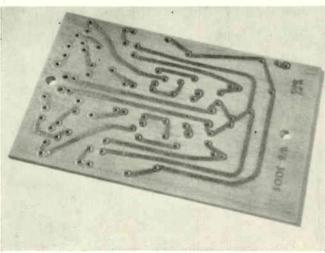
, above, is a full-size printed circuit pattern to be followed in laying out a printed circuit board for June's AUDIOFAN construction project. Holes are numbered for insertion of parts. (See assembly guide on page 19.) The pattern is viewed from the copper side of the board. The etched board, ready for insertion of parts, is shown in Fig. 2, at left.
